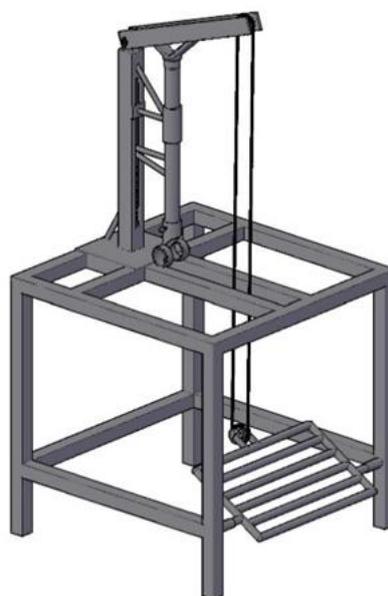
Illustration image of the Sugarcane Bud Chipping Machine.
